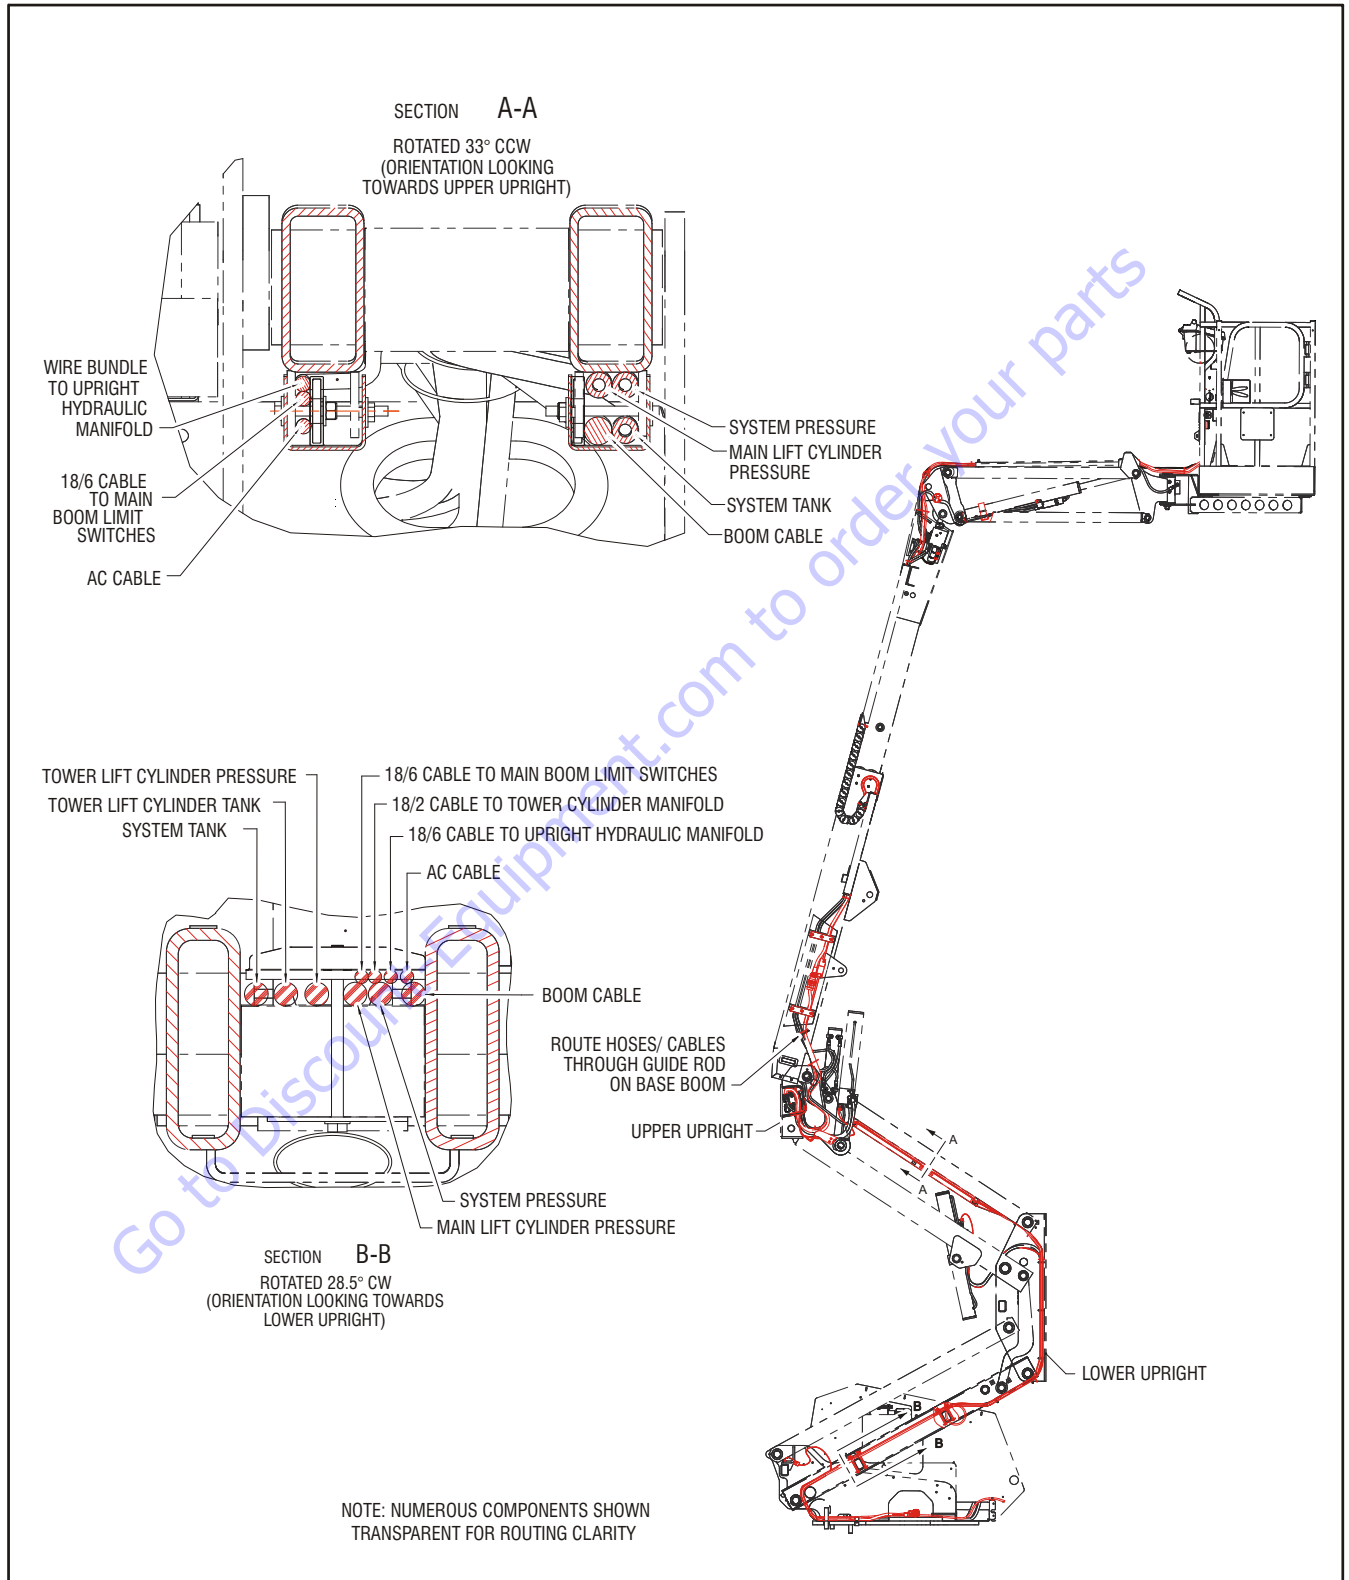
Cable Installation and Identification - Sheet 2 of 8
